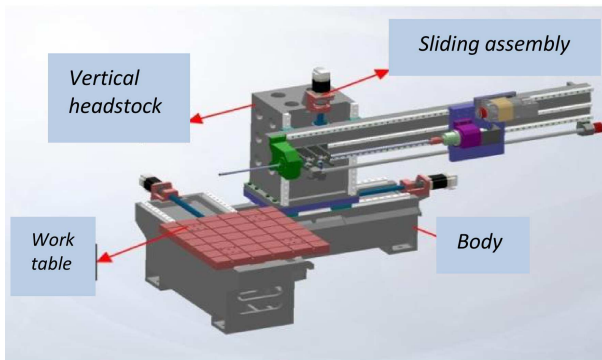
Multi-purpose drilling machine WCZ 140 [18].
